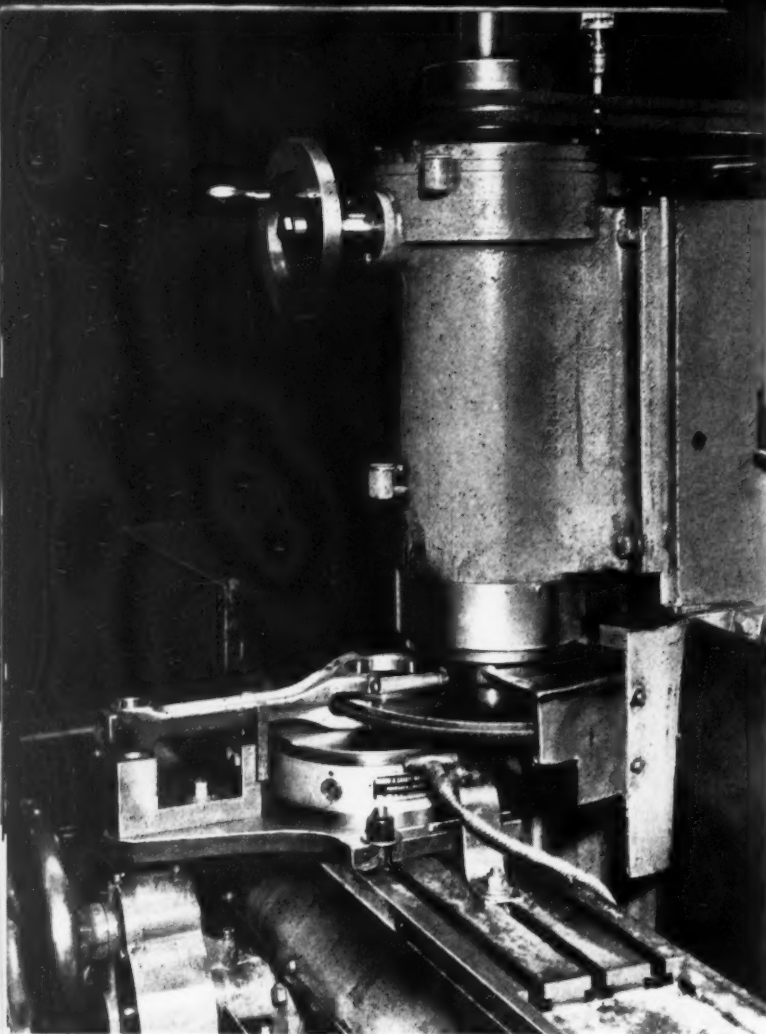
Grinding the Inside Faces on the Fork End of Connecting-rods, with the Work Held on a Permanent-magnet Chuck
